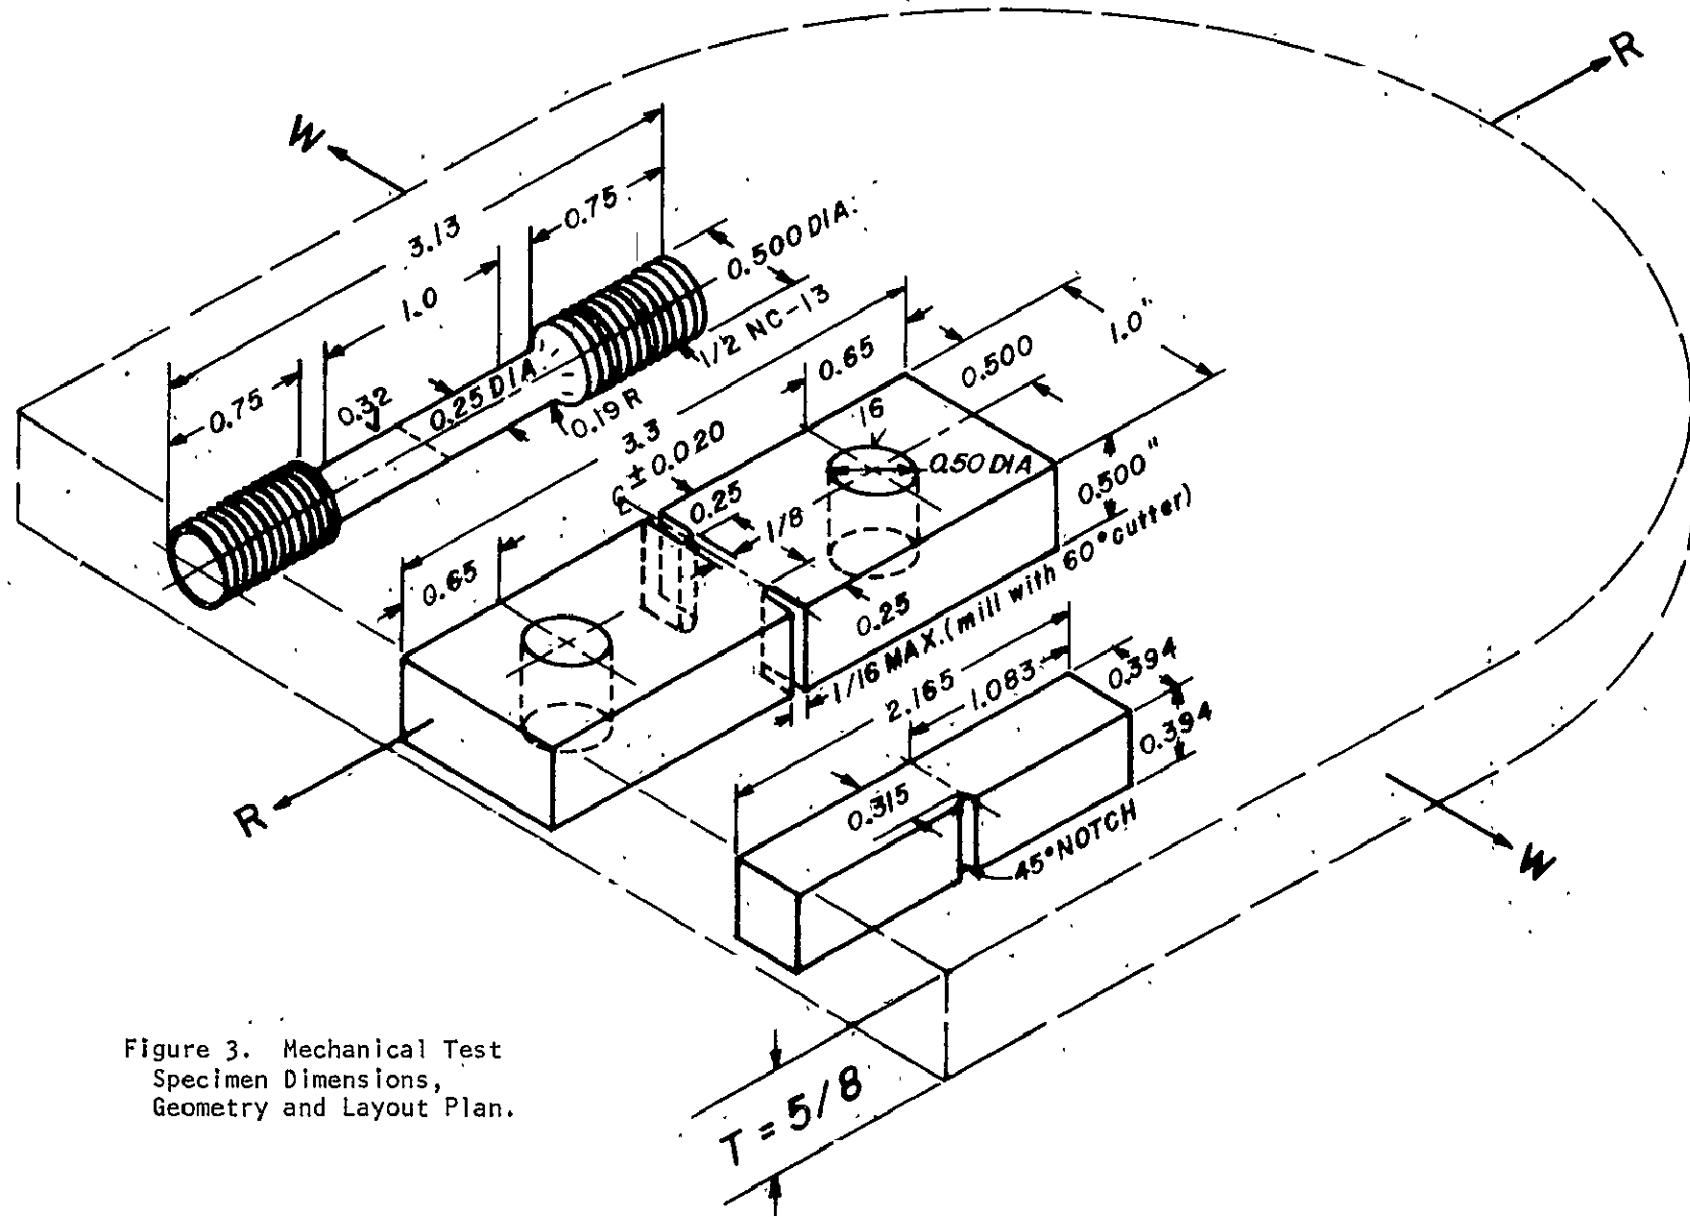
Mechanical Test Specimen Dimensions, Geometry and Layout Plan.
